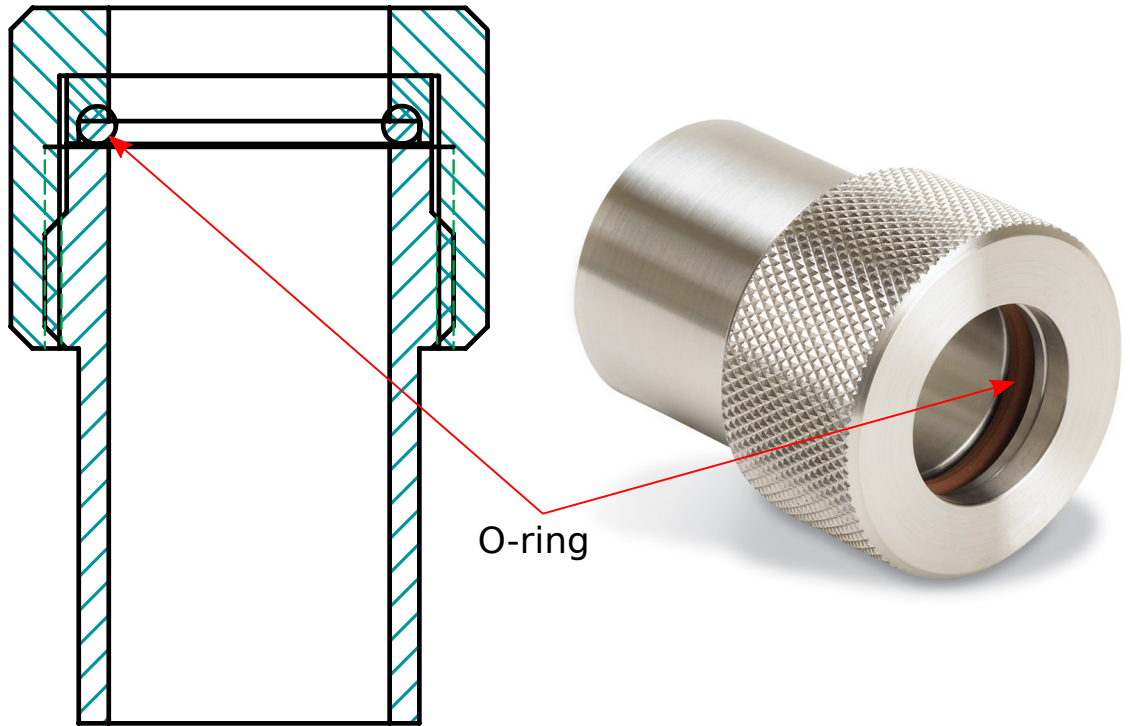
CAD drawing and image of quick connect coupling. Image and diagram from Kurt J. Lesker Company. The dipping probe vacuum can fits through the quick connect. Tightening the knurled section pushes the o-ring into contact with the dipping probe vacuum holding it in place. A flange is welded to the bottom of the quick connect that attaches to a helium transfer dewar.
